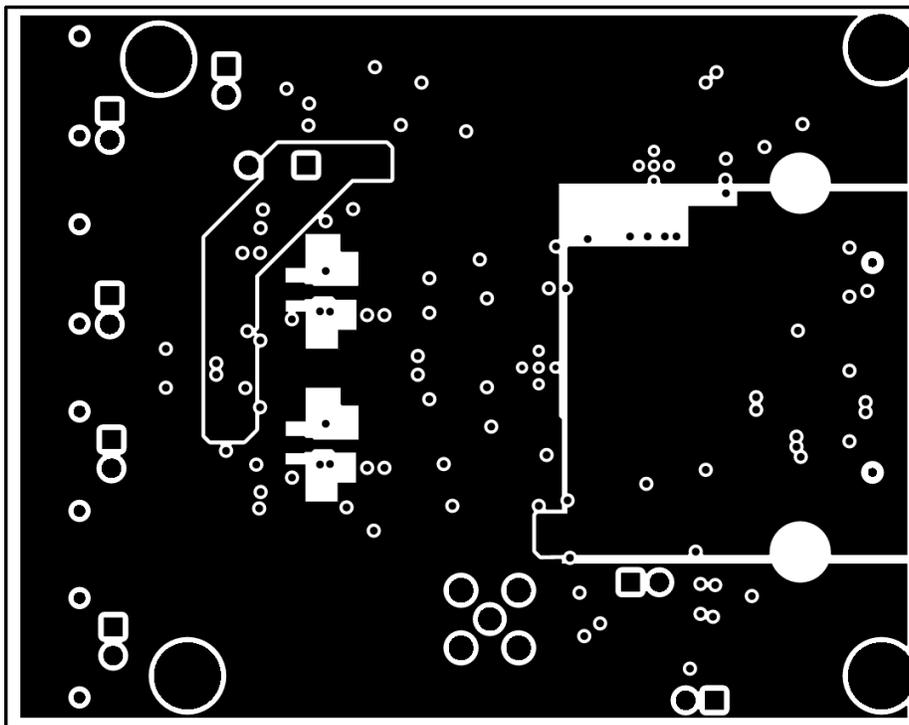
ADS9224REVM PCB Layer 3: Power Planes
